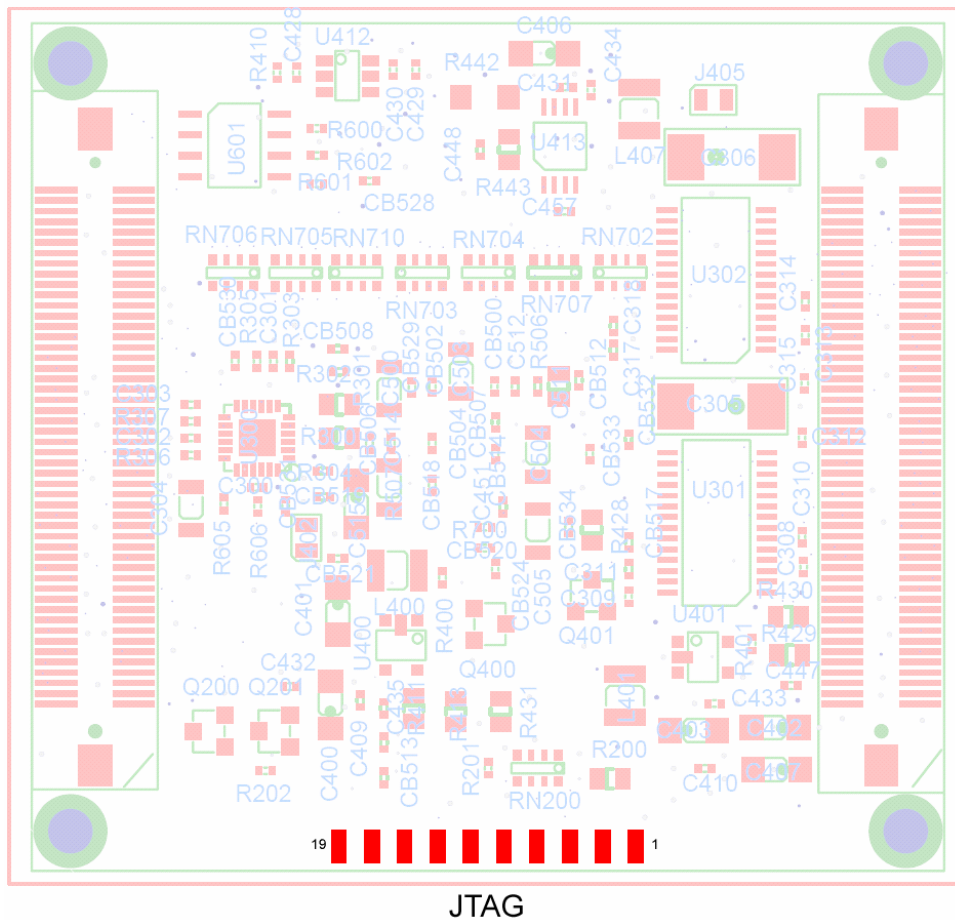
JTAG Edge Connector on the phyCORE-LPC3180 (Bottom View)
